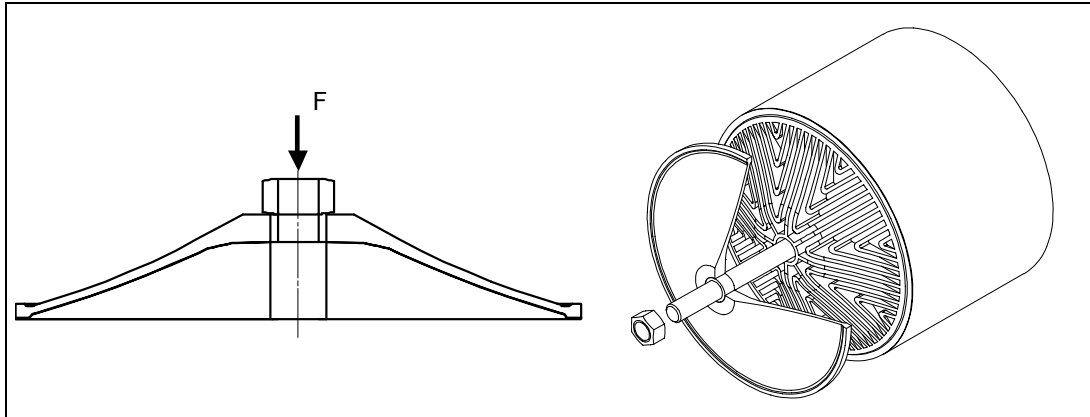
end plate for axisymmetric fuel cell stack based on Dbow-concept, footplate, schematic view
